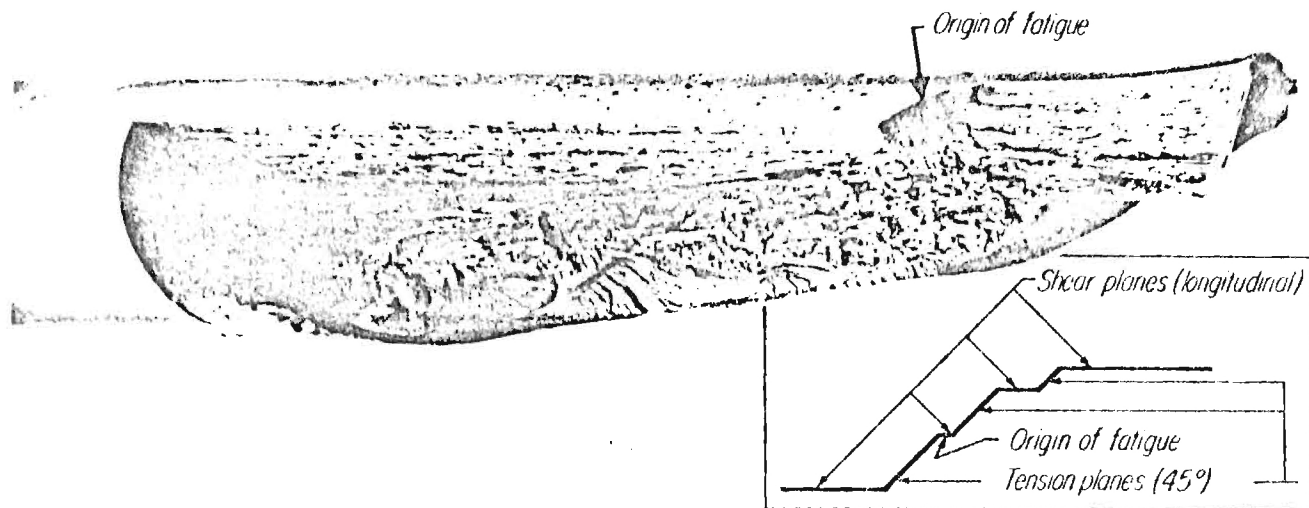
A — Surface of a torsional fatigue fracture in the cylindrical portion of a 1 3/8 in. (35 mm) diameter torsion bar spring of 50B60 steel heat treated to HRC 53. The fatigue crack originated in a very small (0.015 in. [0.4 mm]) longitudinal shear plane and propagated alternately on 45° tension planes and longitudinal shear planes, as indicated in the diagram. Note that the semicircular fatigue area surrounding the origin lies in the 45° plane.
